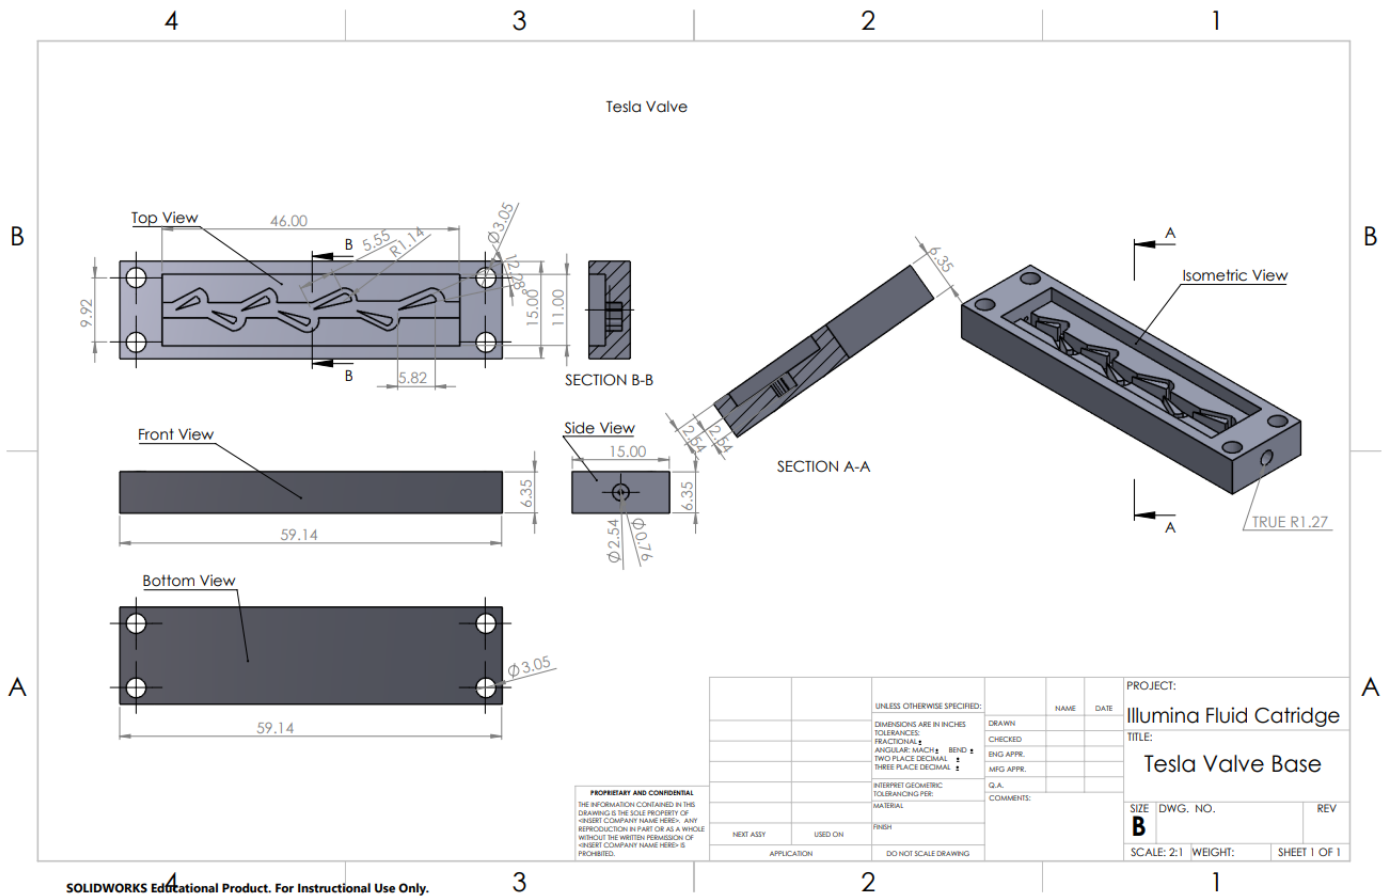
Technical Drawing of Tesla Valve with multiviews (mm). It consists of a main channel and several small channels separated by triangle obstacles. Refer to Appendix C for detailed view
